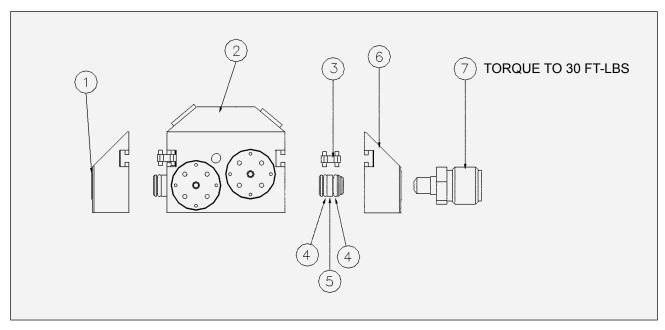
A10826-XX Stand Alone Bell/Block Wash Assembly
